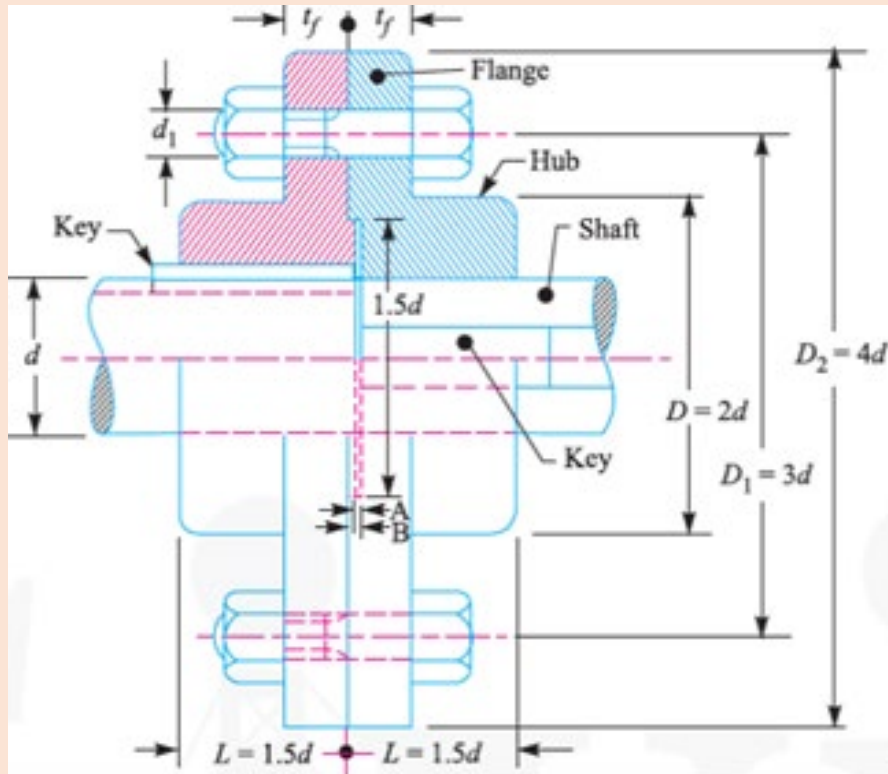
FIGURE I. SECTIONAL VIEW OF FLANGED COUPLING
